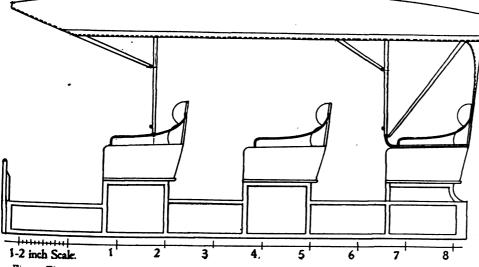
Three seat body carrying six passengers, fitted with a five bow extension top, without tep joints.
